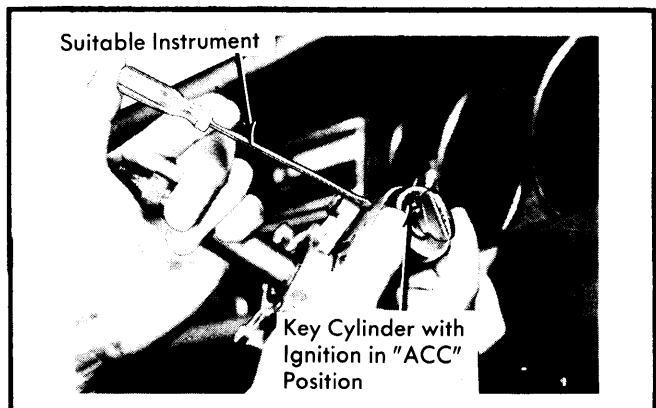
Disengaging Key Cylinder from Position on Mainshaft
